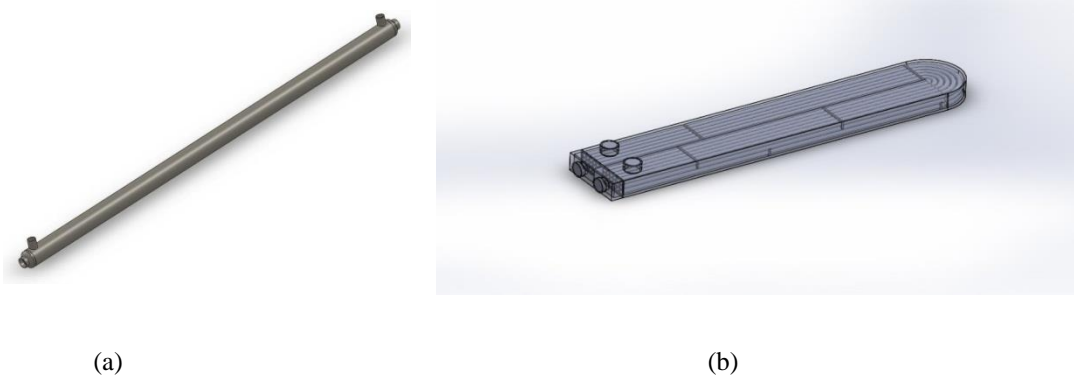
3D model of heat exchanger (a) Optimized round-shaped (b) Optimized pancake-shaped.
